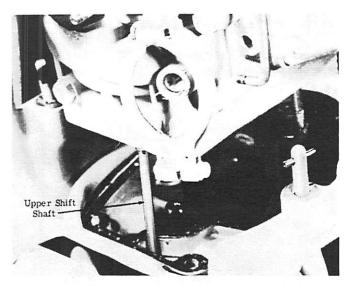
Lifting Powerhead from Drive Shaft Housing on Mark 10-10A-15A
